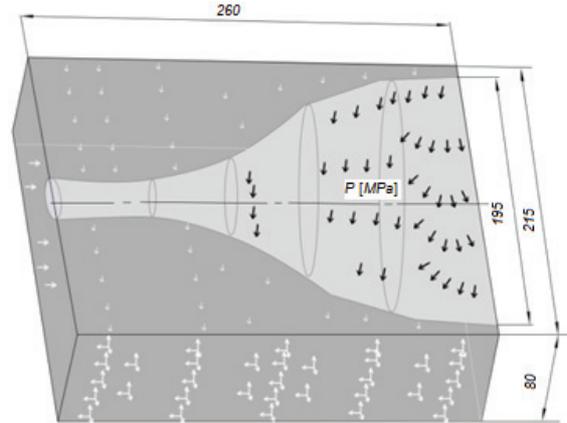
General form of the molding head lower sheet under pressure p , MPa
